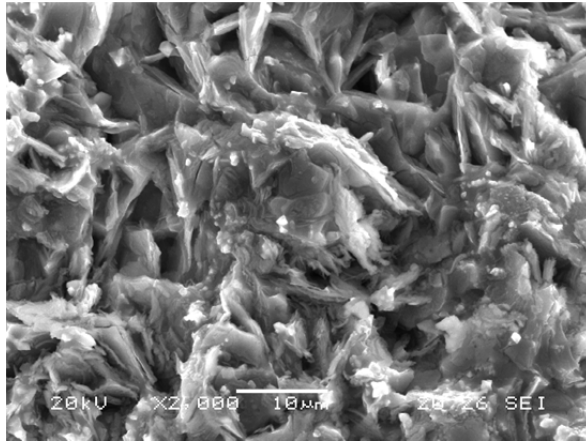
Fractograph of the laser welded joint without Ti filler
